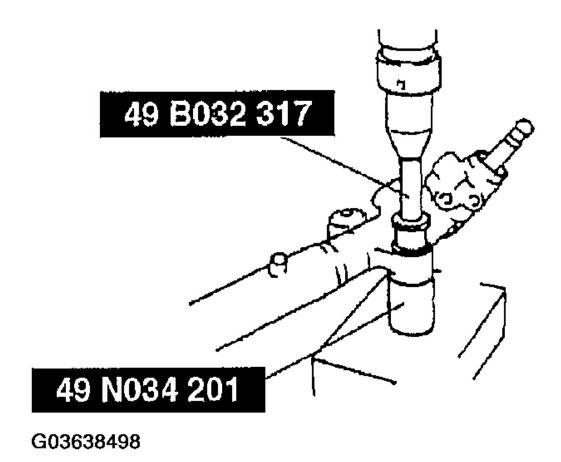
Pressing Mounting Rubber Out From Gear Housing Courtesy of MAZDA MOTORS CORP.
